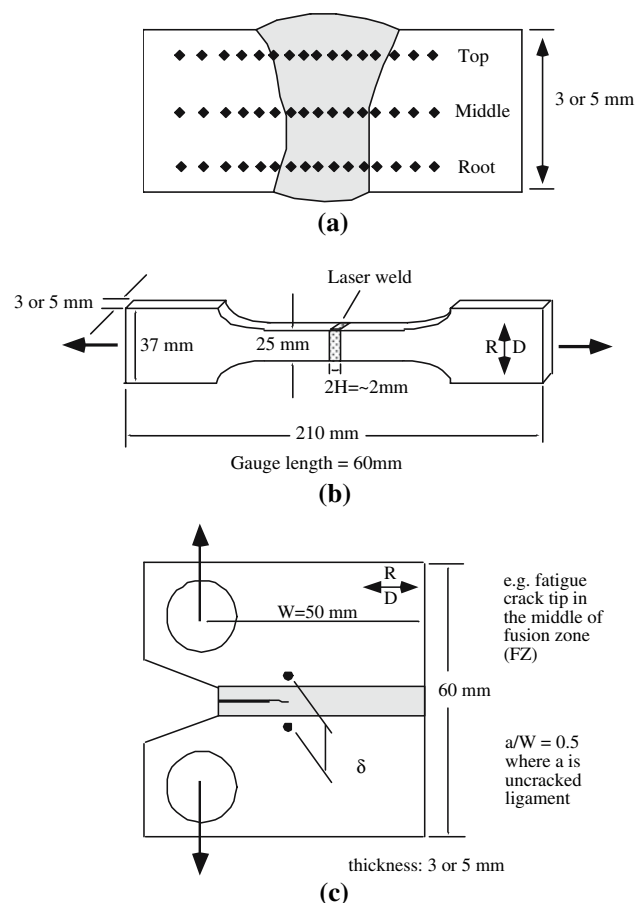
Schematic showing: (a) hardness measurements, (b) tensile test specimens, and (c) compact tension (CT) specimen with local crack tip opening displacement (CTOD) measurement technique of δ_5 . (Note: CTOD fracture toughness is directly measured by δ_5 clip-on-gauge as shown)
